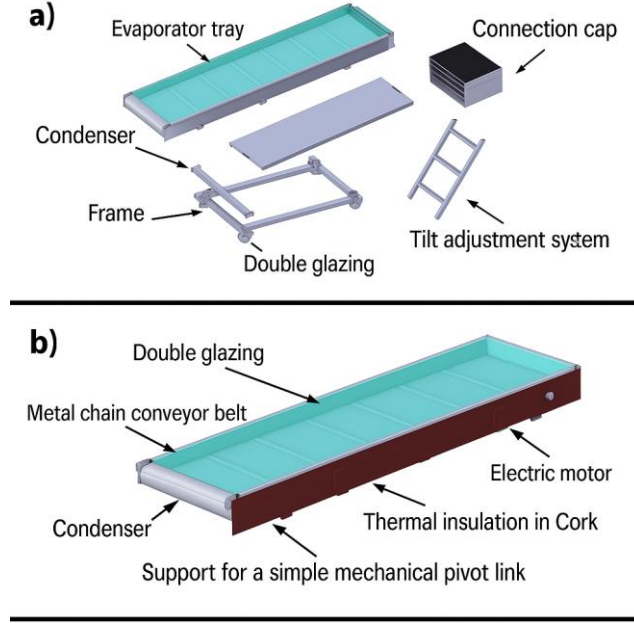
a) Components of the mobile solar still with Passive Condenser, b) Components of the evaporator tray of the solar still [2]
